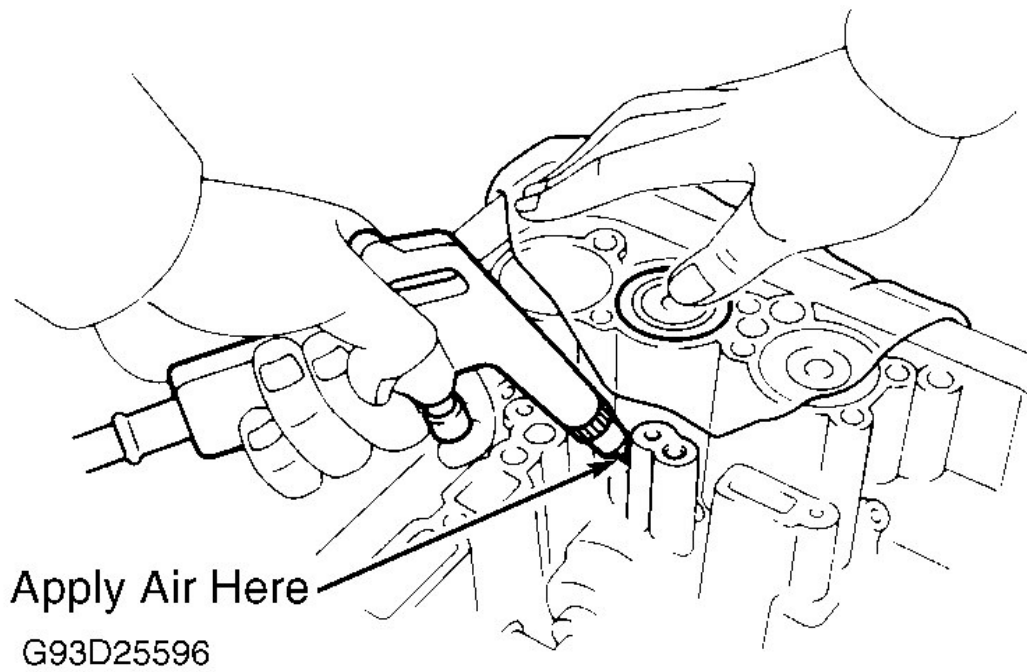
Removing Direct Clutch Accumulator Piston & Spring
